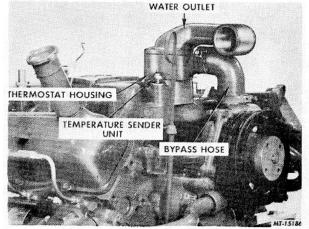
Removing Water Outlet, Thermostat, Housing and Bypass Hose from Intake Manifold
